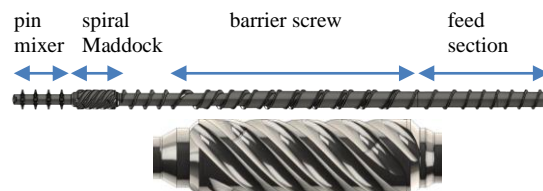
Upper: Extruder screw with four section. Fluid flow is from right to left. Lower: spiral Maddock section.
